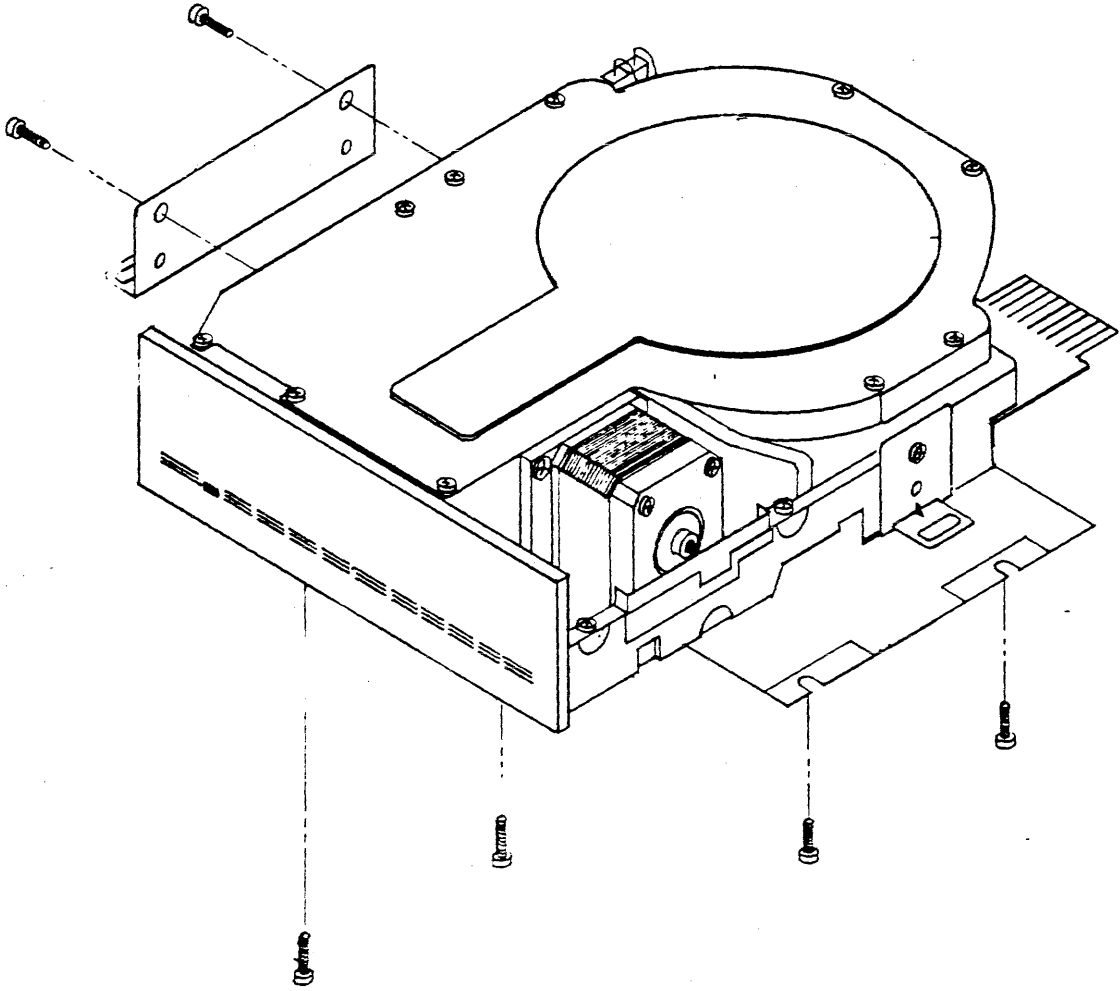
Hard Disk Controller Assembly 32-023-01
